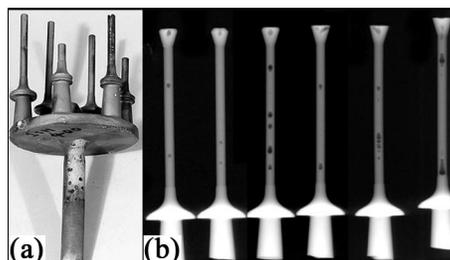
Counter-gravity cast TiAl valves: (a) incompletely-filled mould due to too low a differential pressure; (b) radiograph showing turbulence-induced bubbles due to too high a differential pressure.
